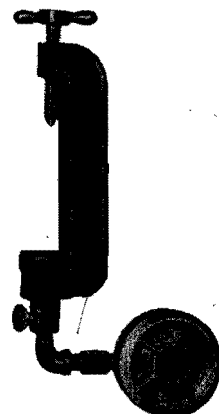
Release Control Retainer Exhaust Gage Fitting.
